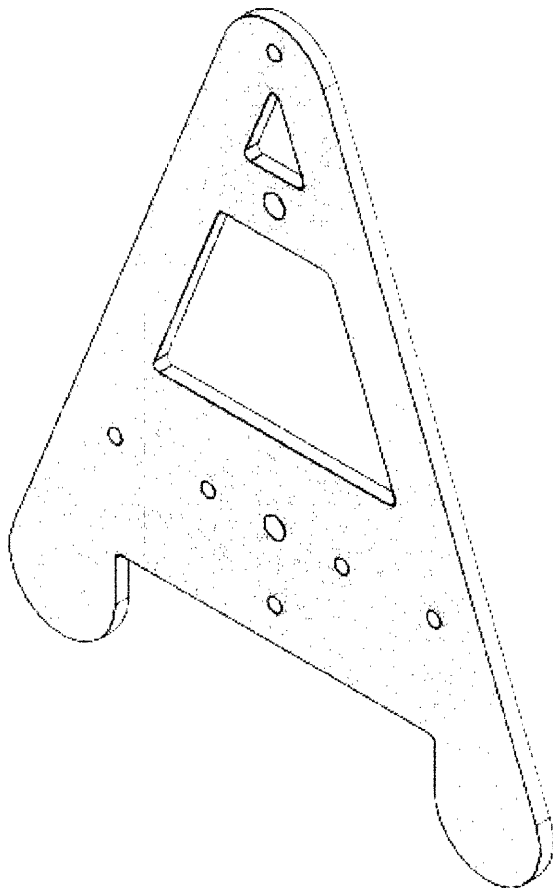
Side frame made from polycarbonate. A part drawing is generated in SolidWorks and then machined in the water jet cutter.
